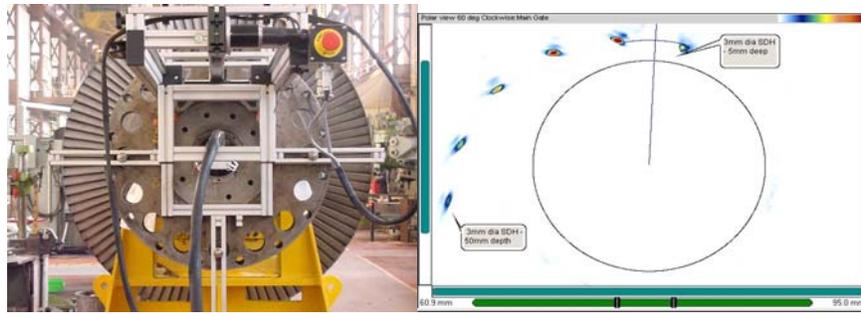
Rotor Bore Inspection System & Fig 5 – Volumetric Inspection – Polar View
